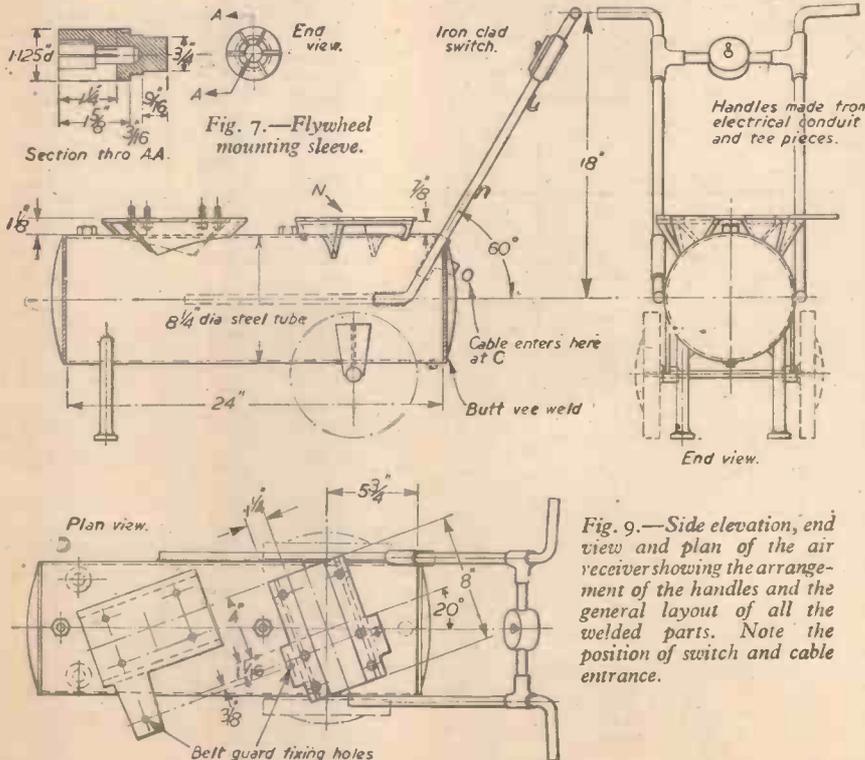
Side elevation, end view and plan of the air receiver showing the arrangement of the handles and the general layout of all the welded parts. Note the position of switch and cable entrance.
